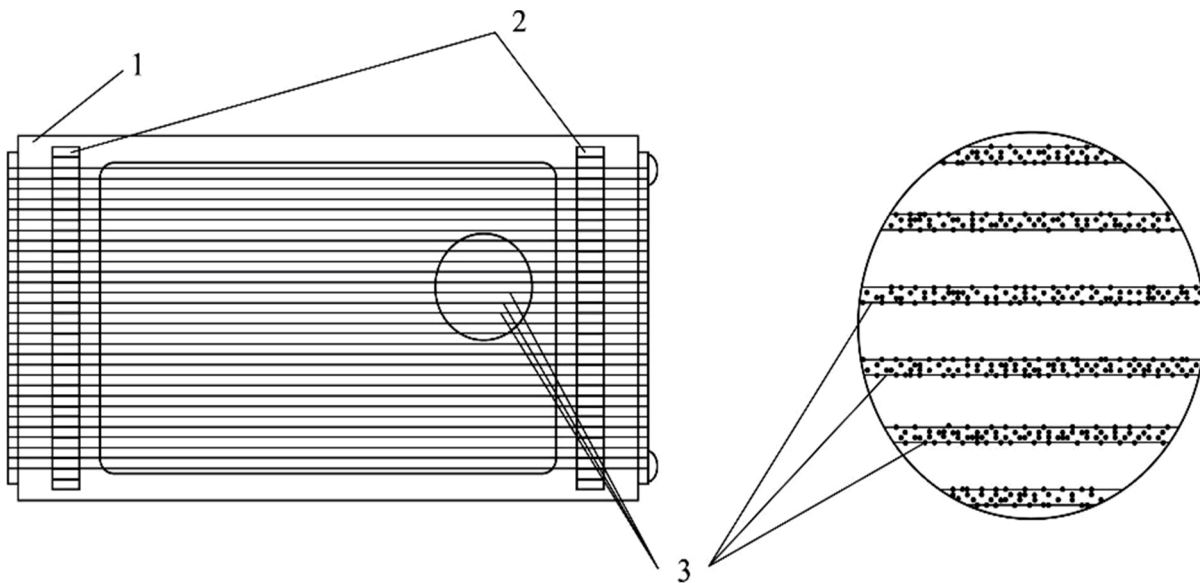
Tool for cutting with wires with fixed diamond grains: 1 – tool, 2 – size bars; 3 – wires with fixed diamond grains.
